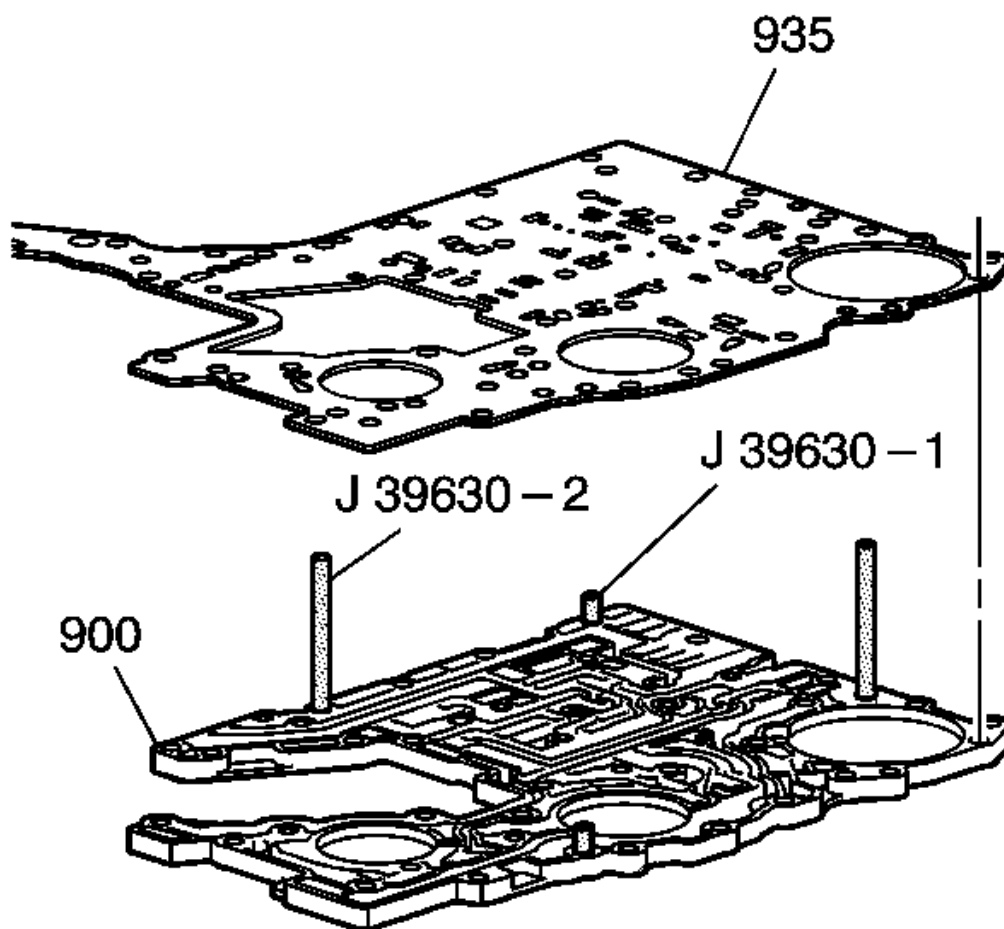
Installing The Spacer Plate And Gasket Assembly (935) Onto The Lower Channel Plate Using J 39630-1 & J 39630-2
